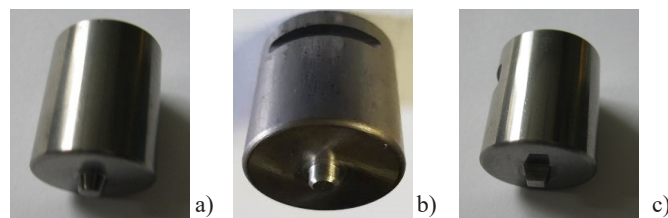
FSW tools: a) - smooth conical pin, b) - smooth cylindrical pin; c) - conical pin with 4 flat chamfers
